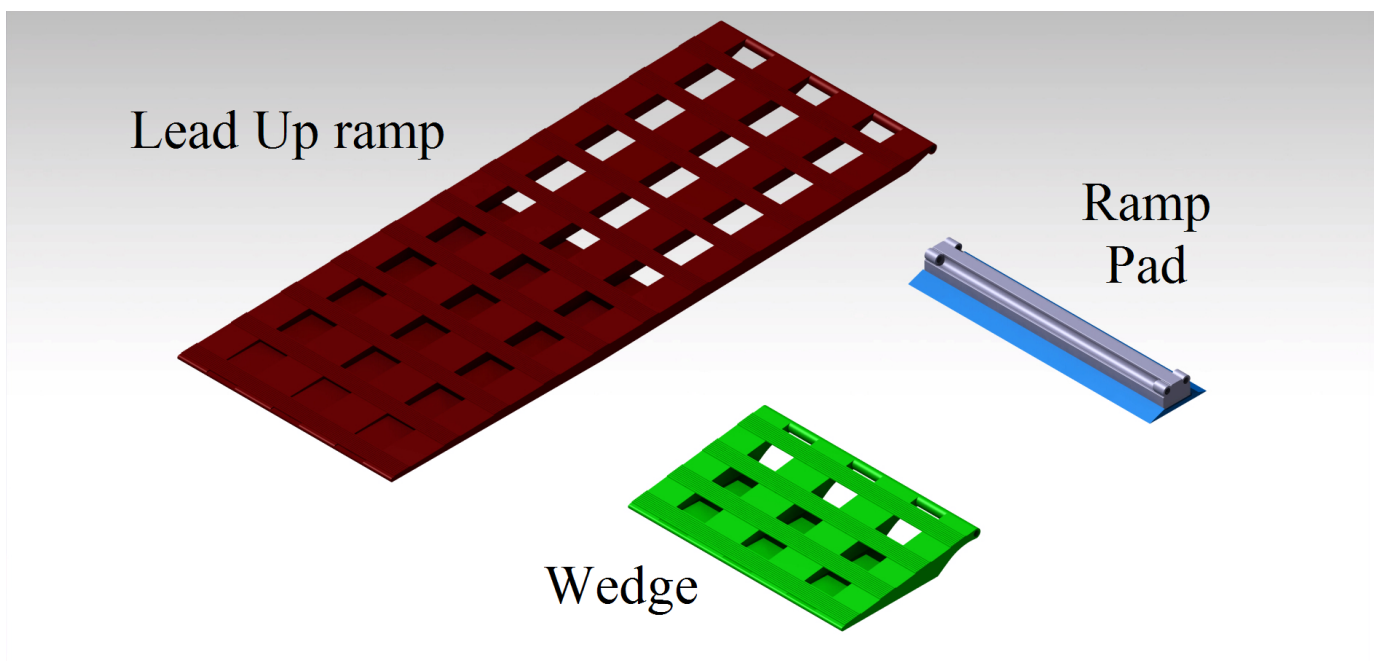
Entrance elements of the ramp and ground ramp pad
